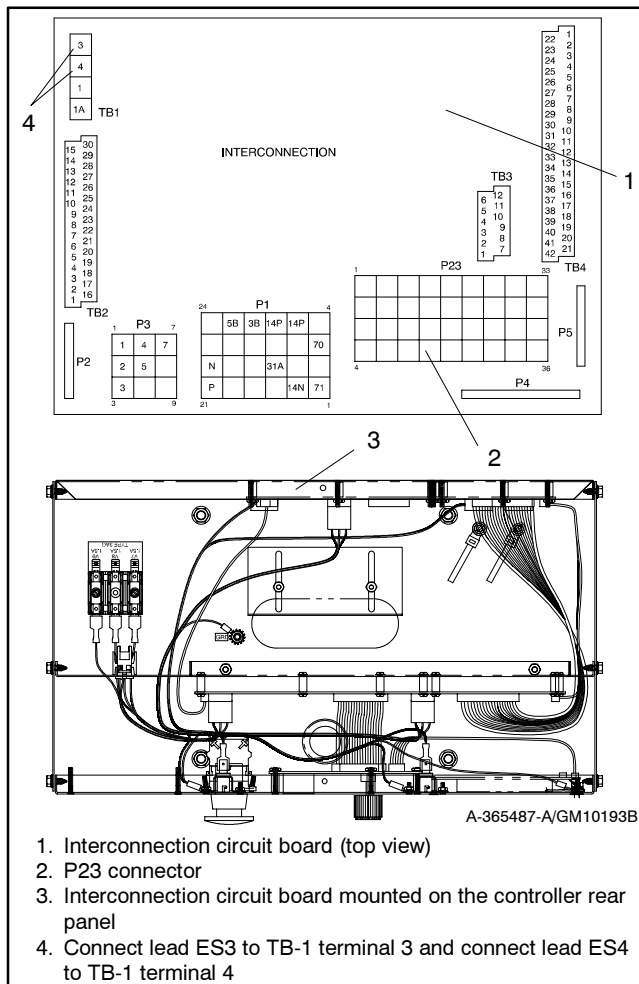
Attaching Wiring Connection Harness to Controller Circuit Board
